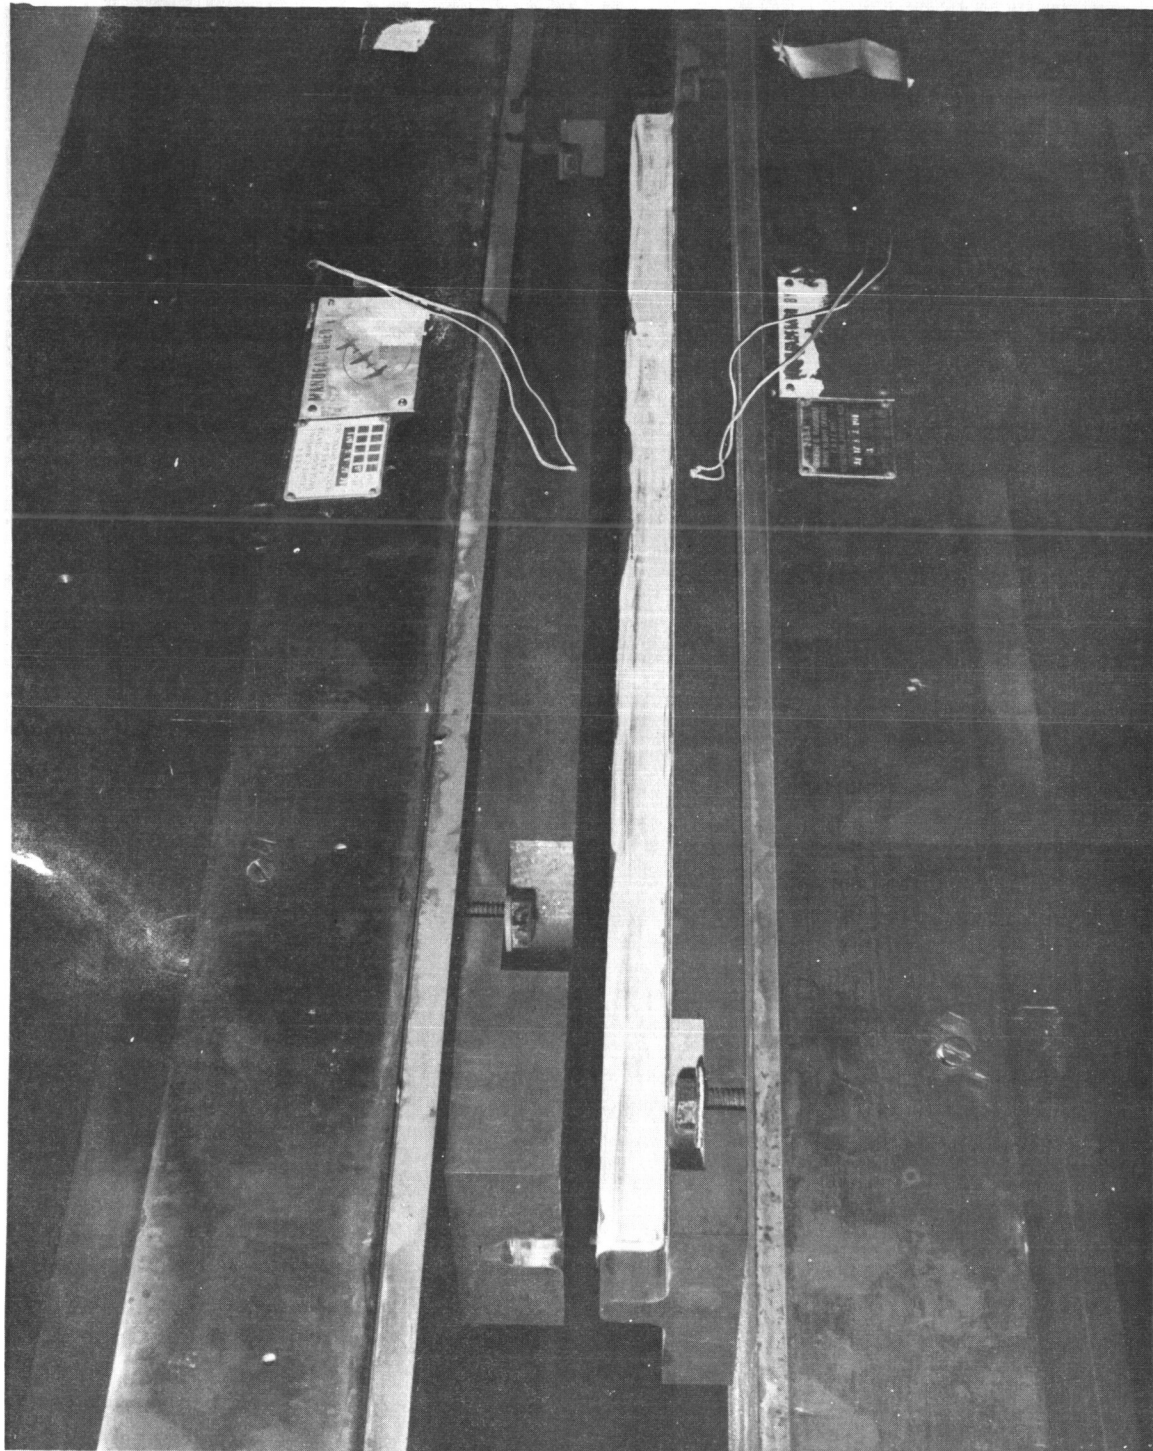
FORMED "HAT" SECTION - SIDE VIEW
